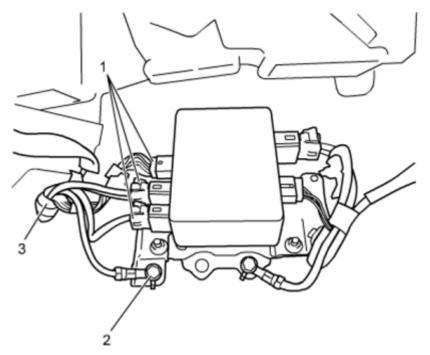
Identifying P/S Control Module Connector Courtesy of SUZUKI OF AMERICA CORP.
